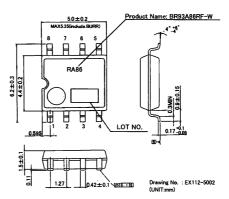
(b) PHYSICAL DIMENSION SOP8 (BR93A86RF-W)
